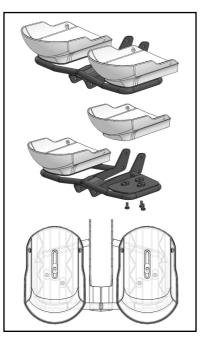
Knee support and slider assembly Source: Exero [7]
